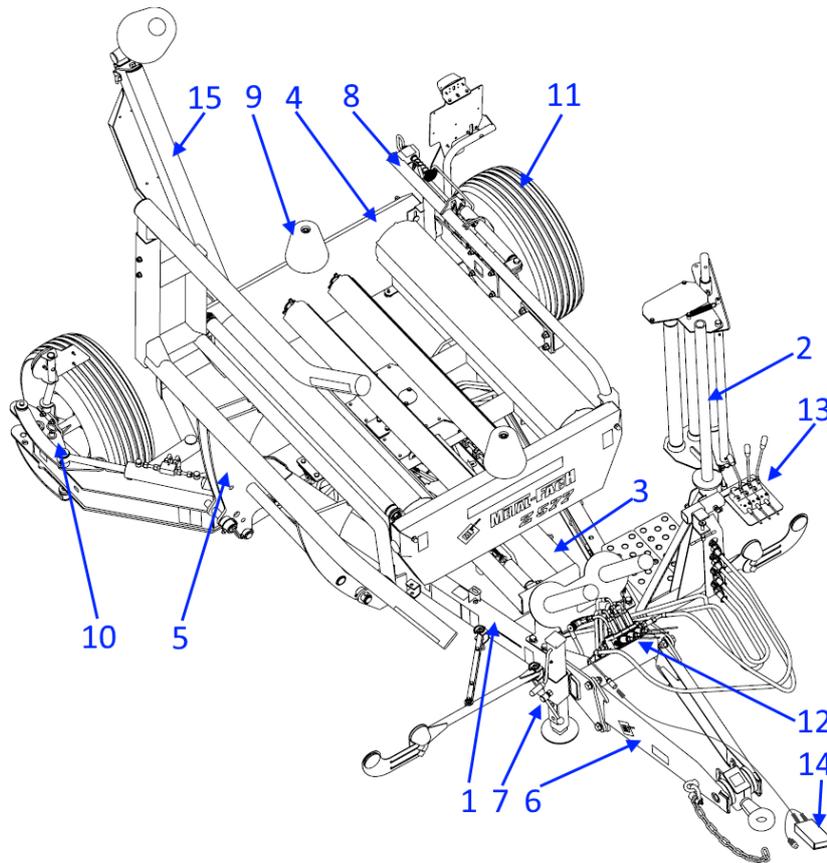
Wrapper design 1 – Main frame, 2 – Film feeder, 3 – Moving frame, 4 – Rotary frame, 5 – Loading arm, 6 – Drawbar, 7 – Support foot, 8 – Cutting unit, 9 – Side cone, 10 – Rotating axle shaft, 11 – Fixed-axle shaft, 12 – Hydraulic manifold, 13 – Control levers 14 – L-02 Counter, 15 – Bale tipper
